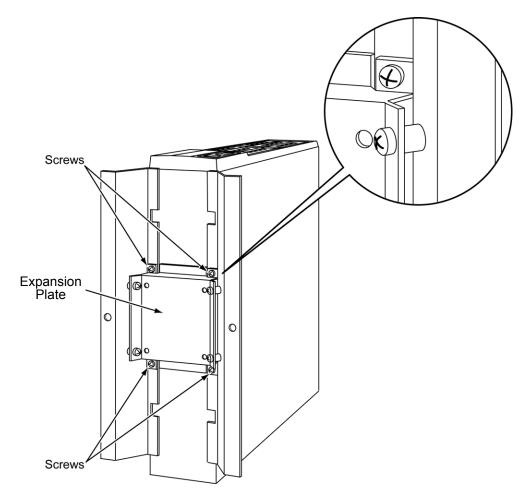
Secure CHS2U-US Chassis to CHS2U STAND KIT with Screws
